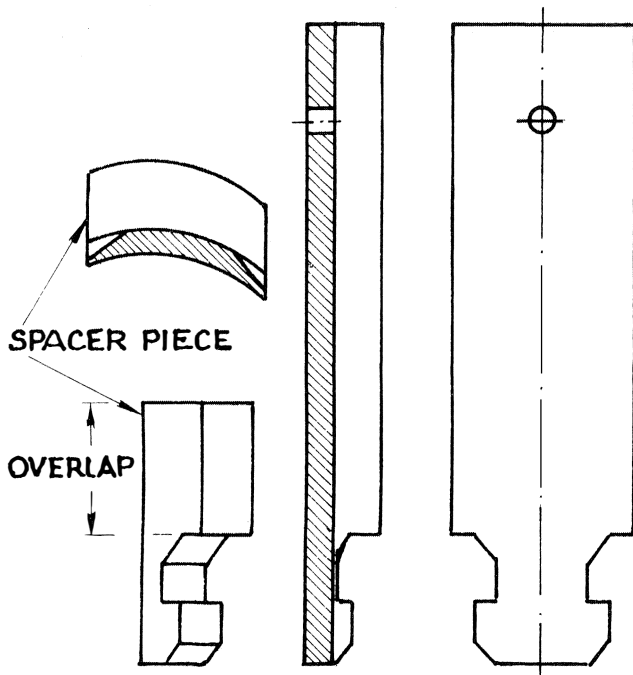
Sheet Metal Blade and Spacer Piece [15].
